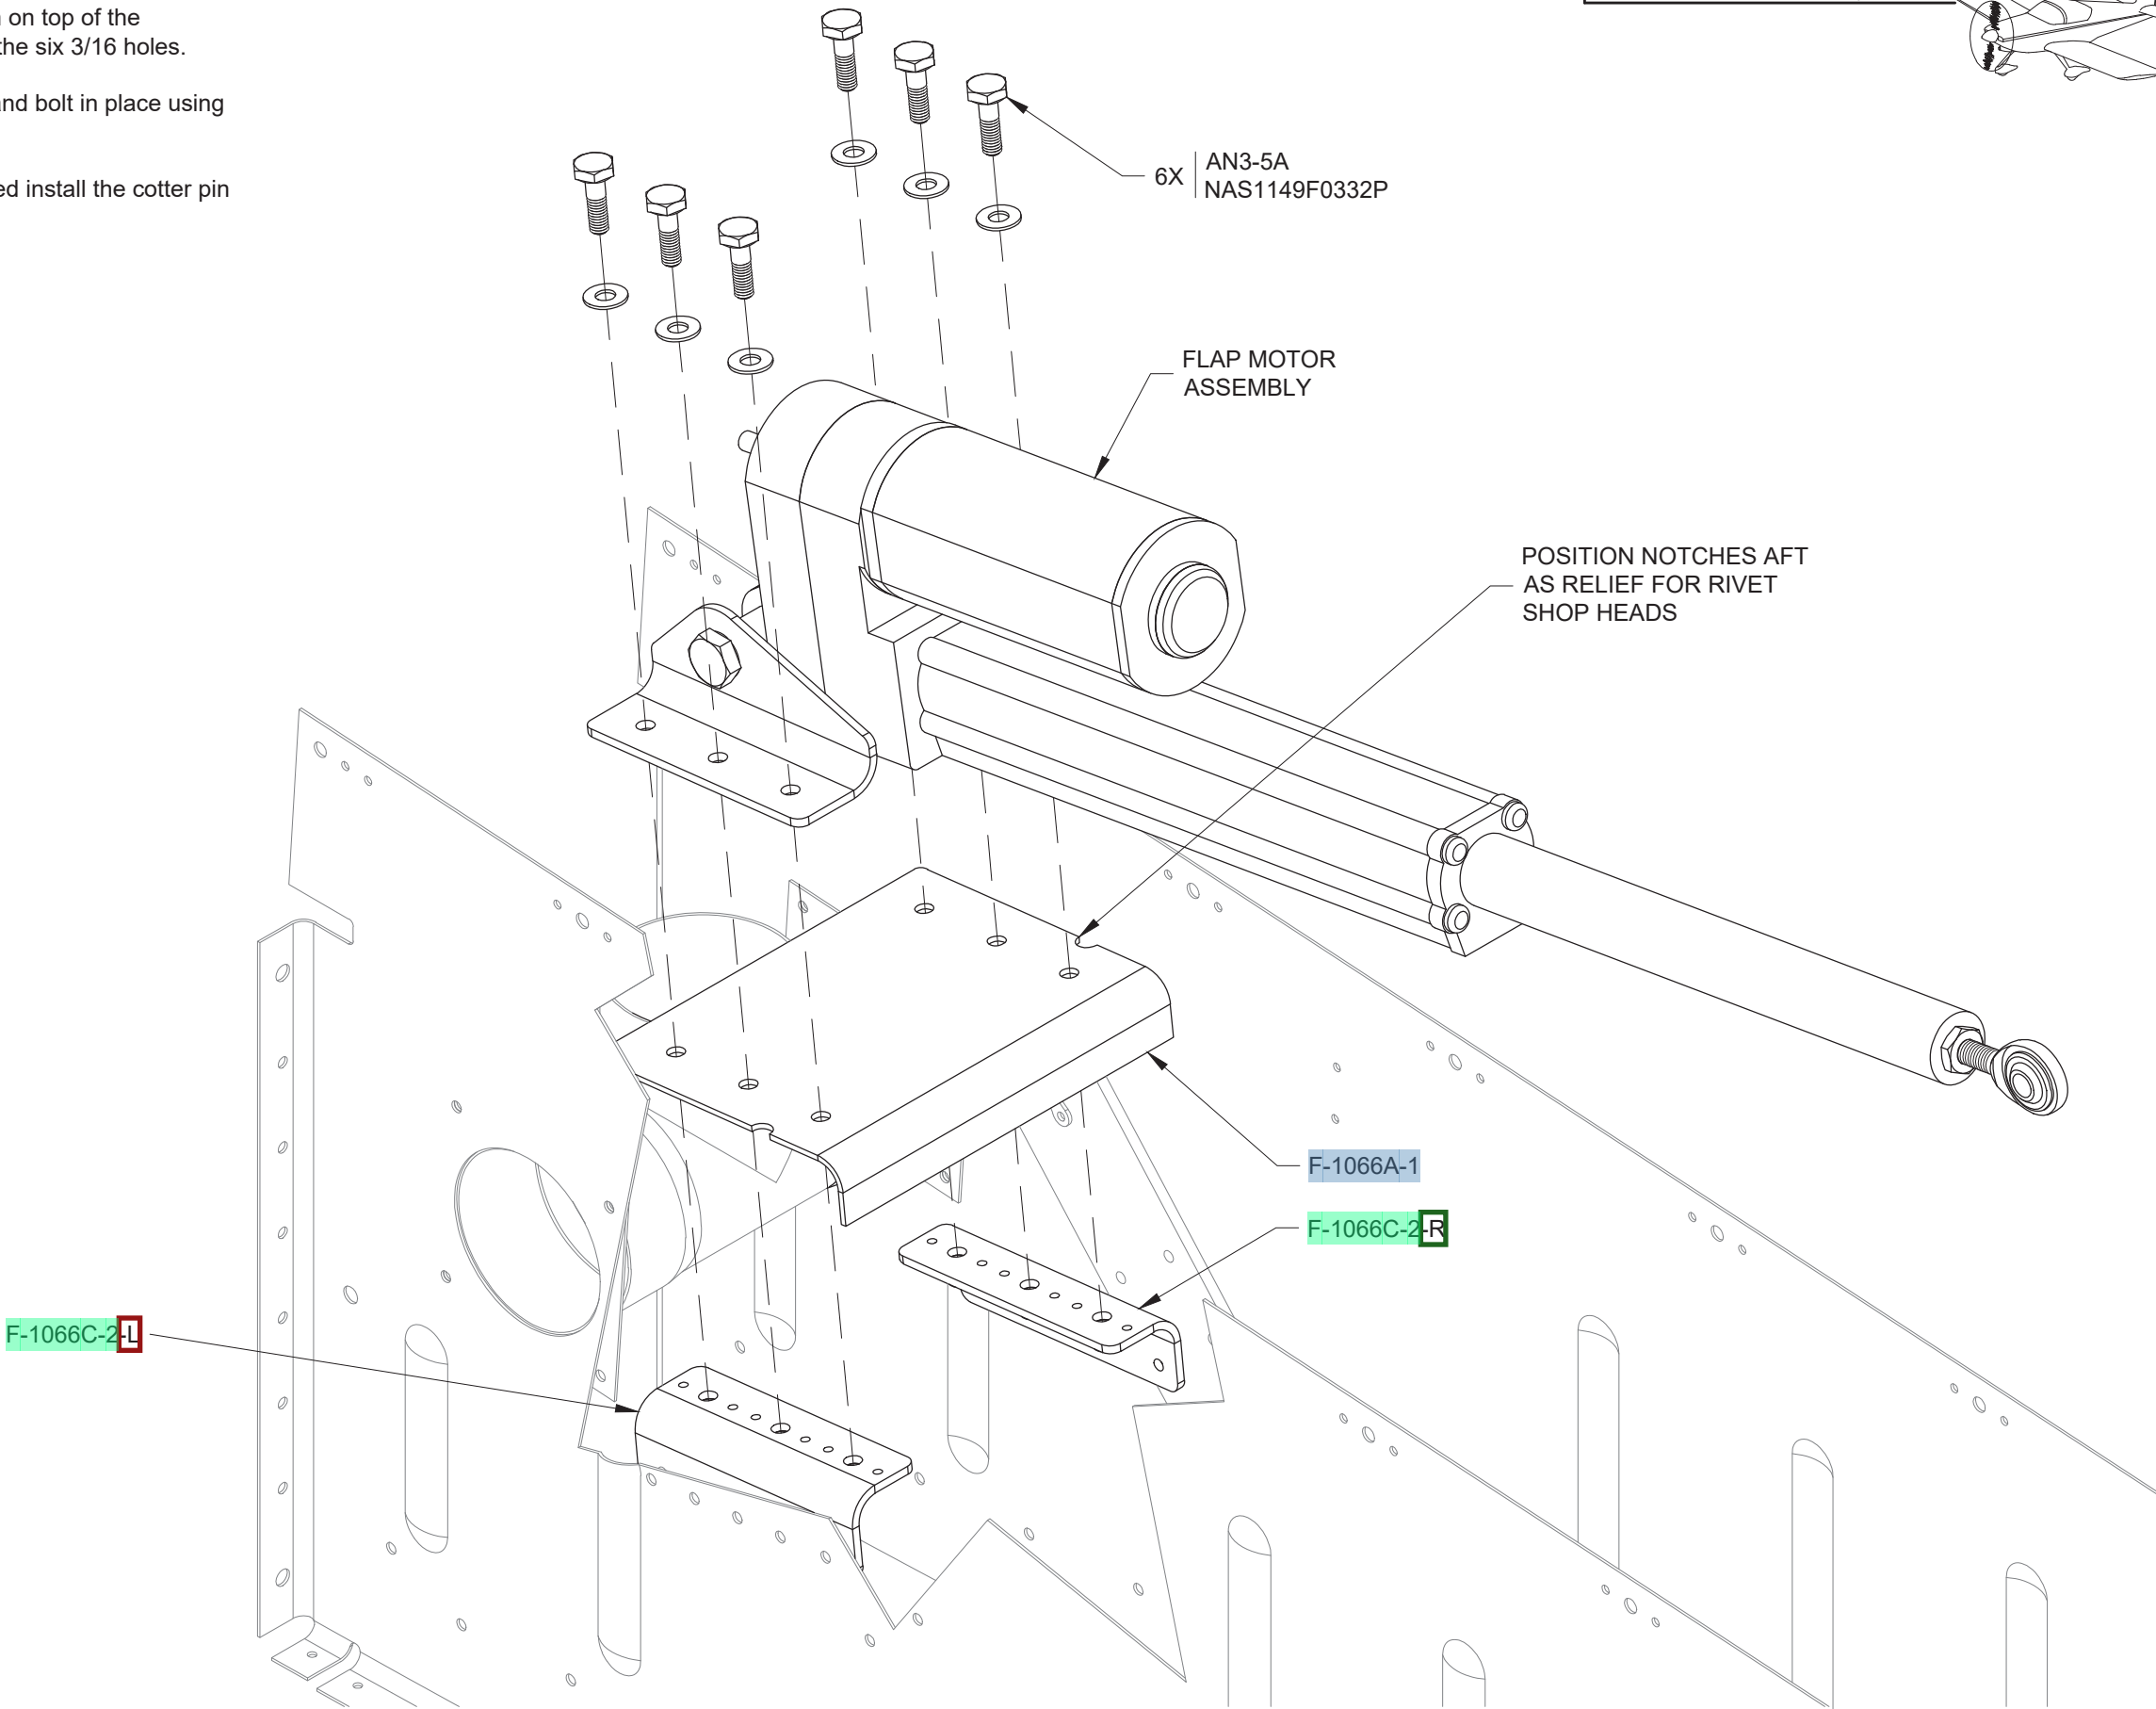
FLAP MOTOR ASSEMBLY INSTALLATION
